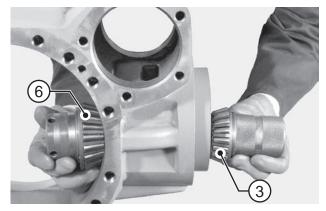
Remove the gauge and take out tool and bearing kits from the main body.
